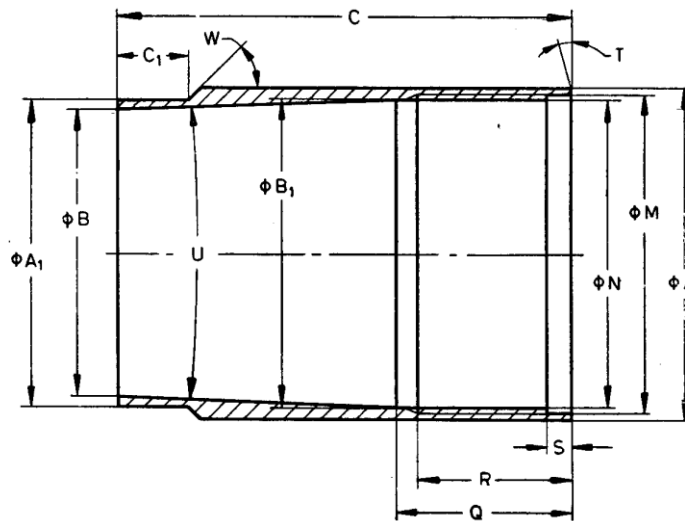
'WF' DESIGN DOUBLE TUBE CORE BARREL — CORE LIFTER CASE
